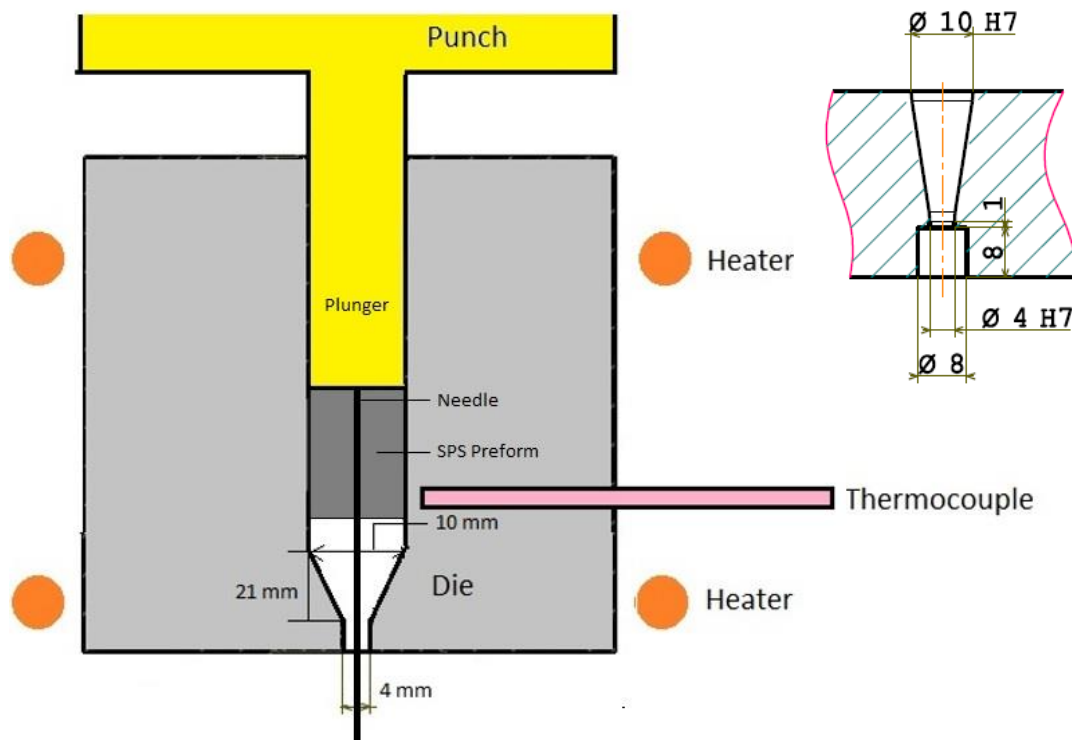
Schematic drawing of the extrusion (main) and the die drawing (upper right).
